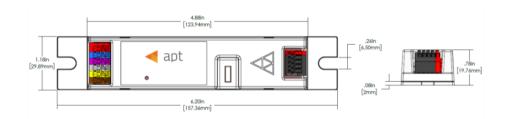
APT-CV4-Vx-LN-CVO Mechanical Drawing
